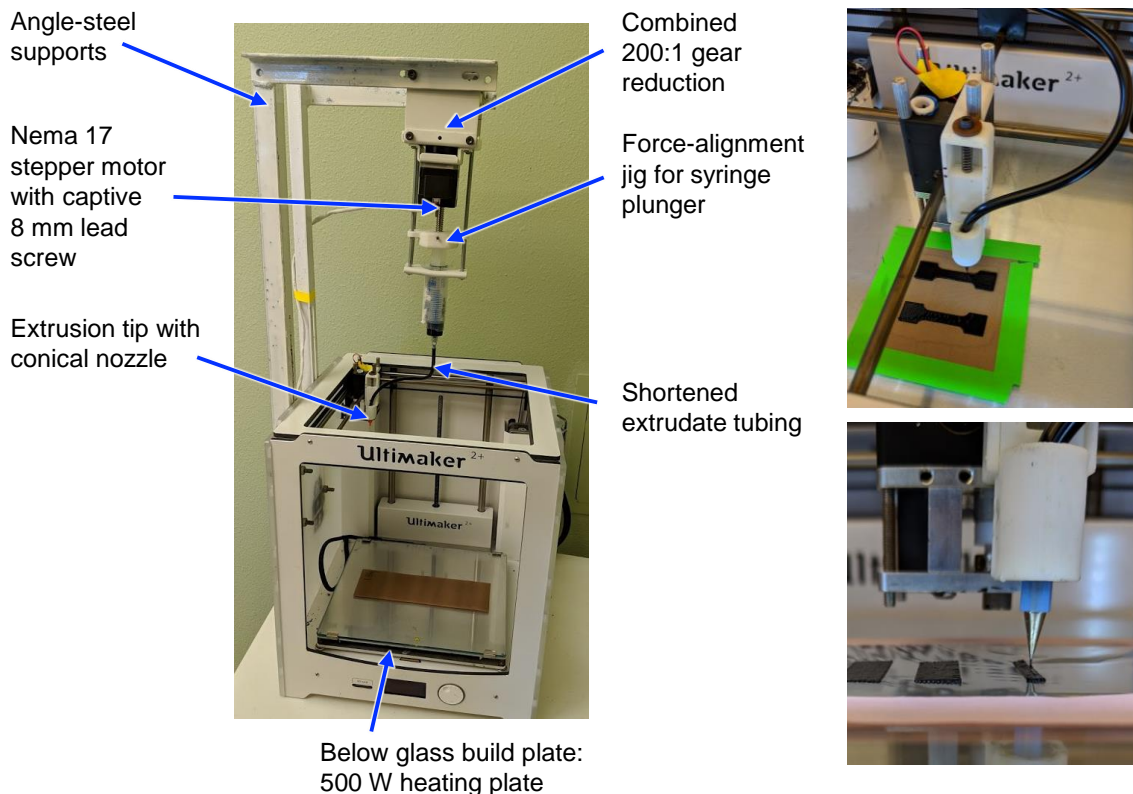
(a) Modified Discov3ry Paste Extruder mounted on a support structure above the Ultimaker 2+ with the key components labeled. (b) and (c) angled and side views, respectively, of the extrusion assembly area.
